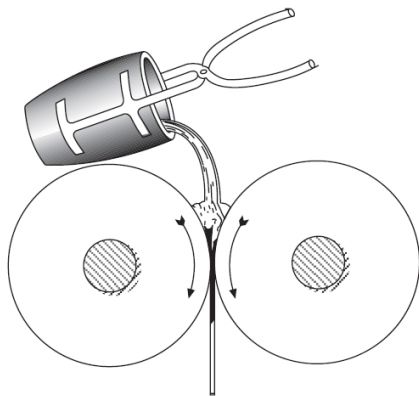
Attempt at direct strip casting by Henry Bessemer in 1856 [2].
